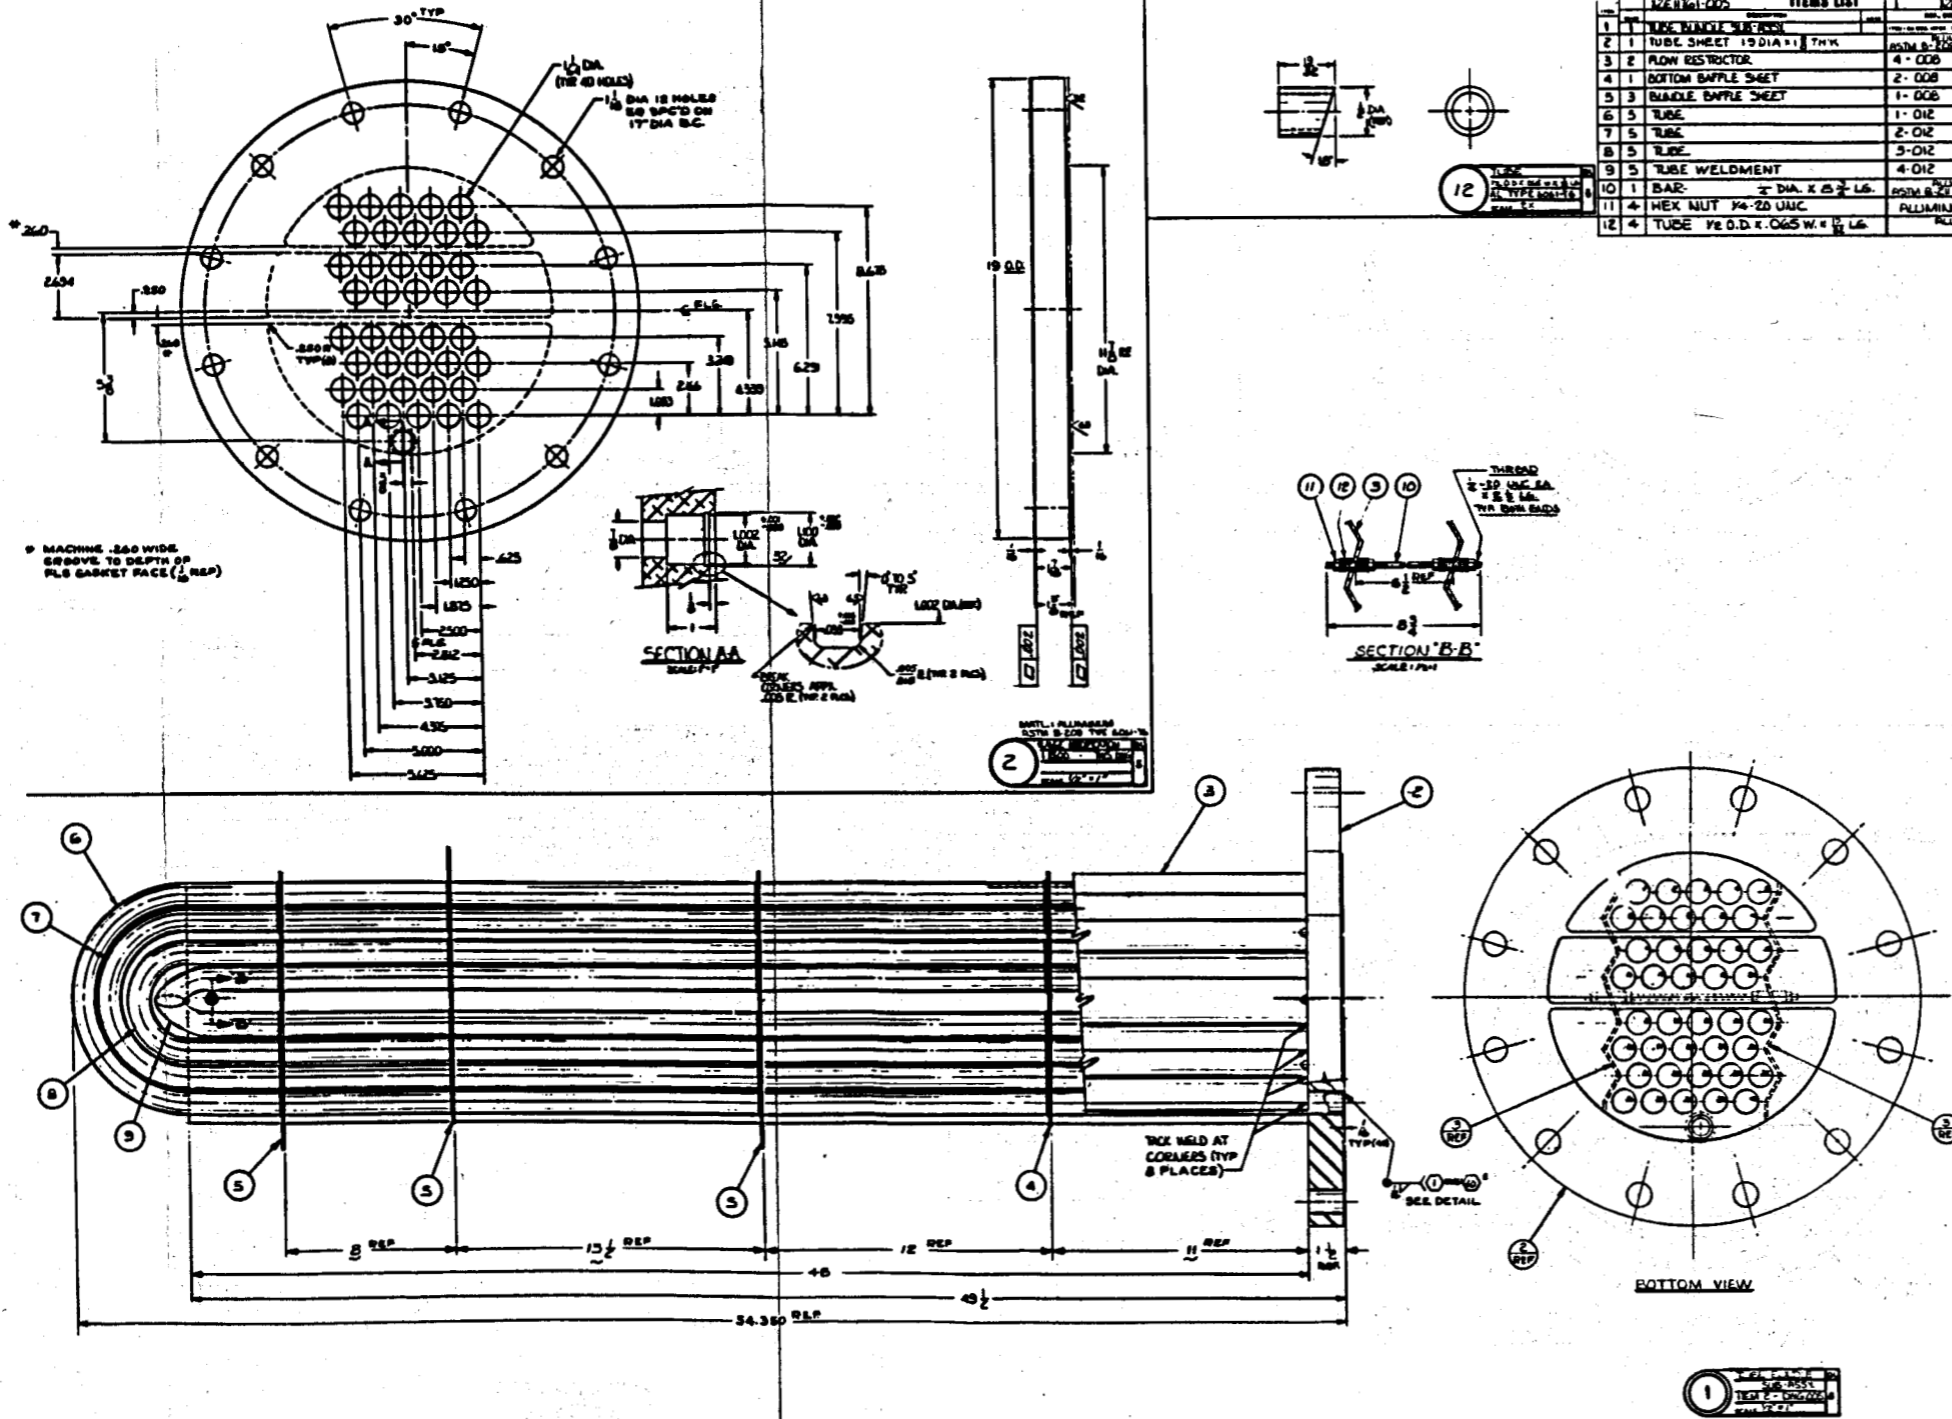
The ORNL 40-tube condenser - tube bundle drawing.
